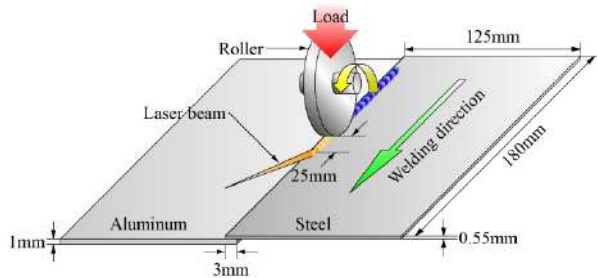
Setup of specimens in Laser Roll Welding
